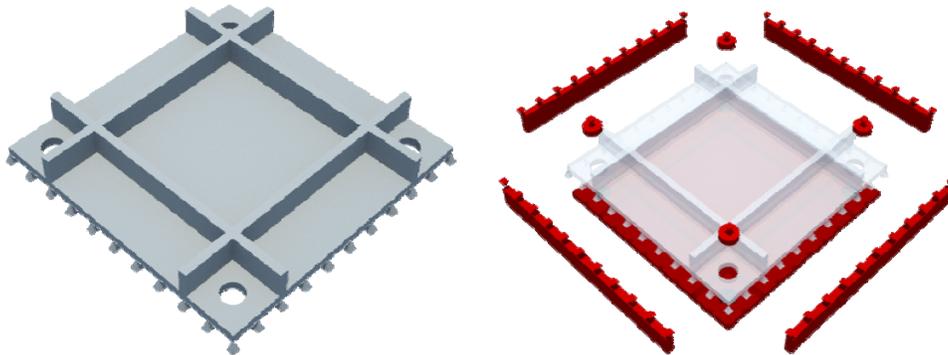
A three dimensional view of a base plate and its constituting substructures
